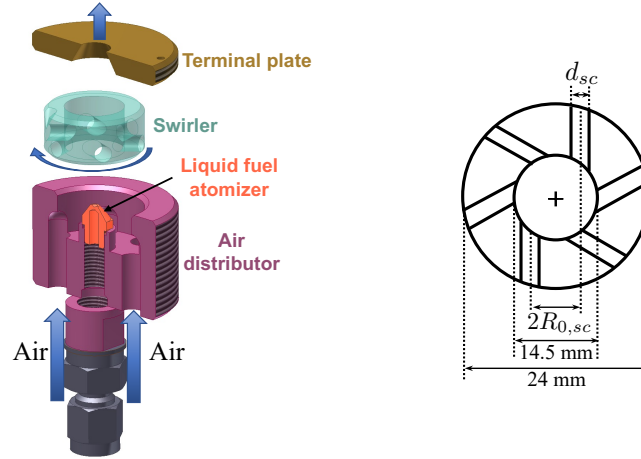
Exploded view of the swirling injector showing its various components. Adapted from Vignat (2020). The injector unit comprises an air distributor, a hollow cone atomizer, a swirler, and a terminal plate. The terminal plate features a converging conical section having a diameter of 8 mm at the outlet. The schematic of the swirler is shown on the right. The channel diameter d_{sc} and radial location $R_{0,sc}$ can be changed to vary the swirl number and pressure drop.
